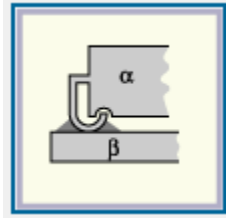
A cross-section through solder structure – compliant leaded chip carrier (J-lead)
